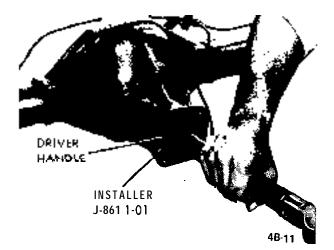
B-11 Installing Front Pinion Bearing Outer Race
